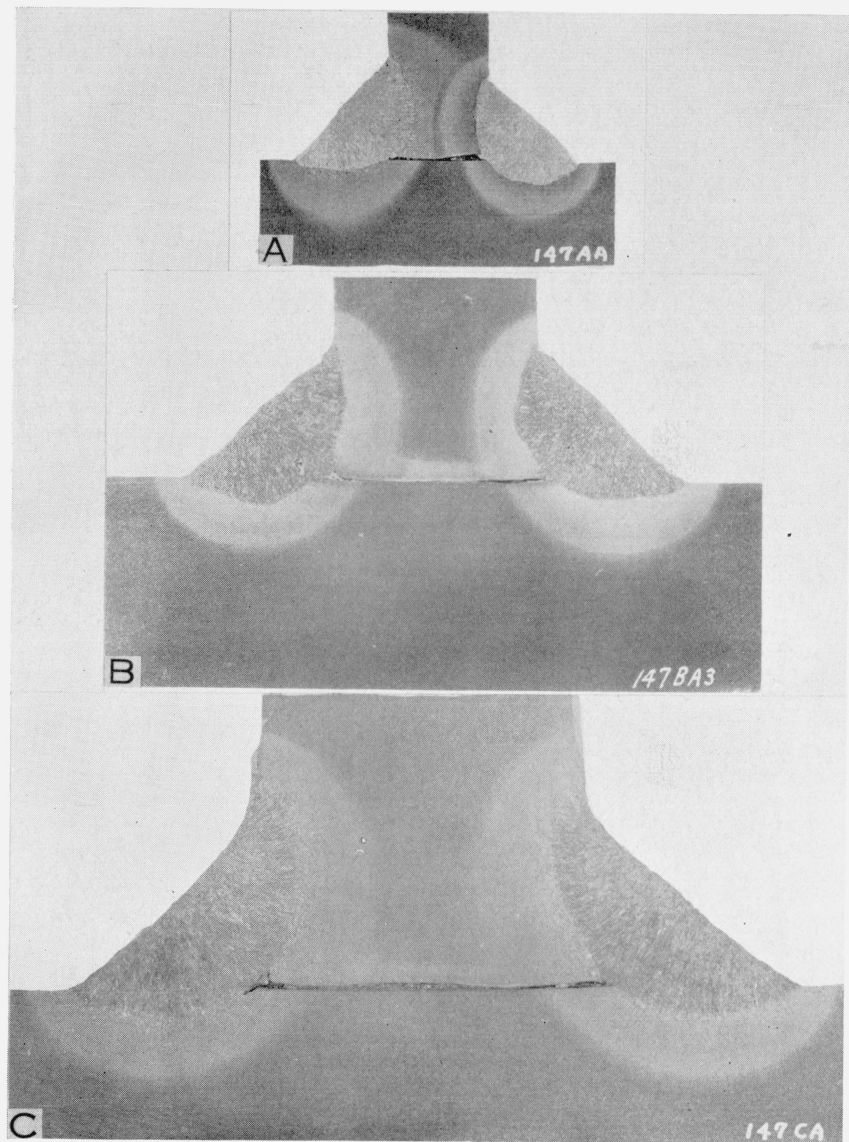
Typical macrostructures of the welded specimens.
